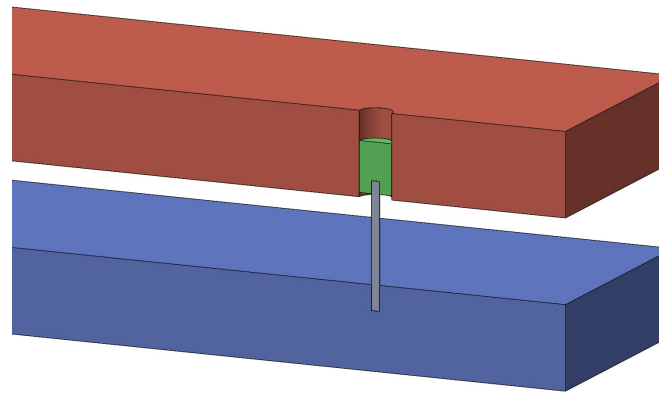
Section view of the suspension between the top and bottom plate using a wire flexure (grey) and a threaded rod (green).
